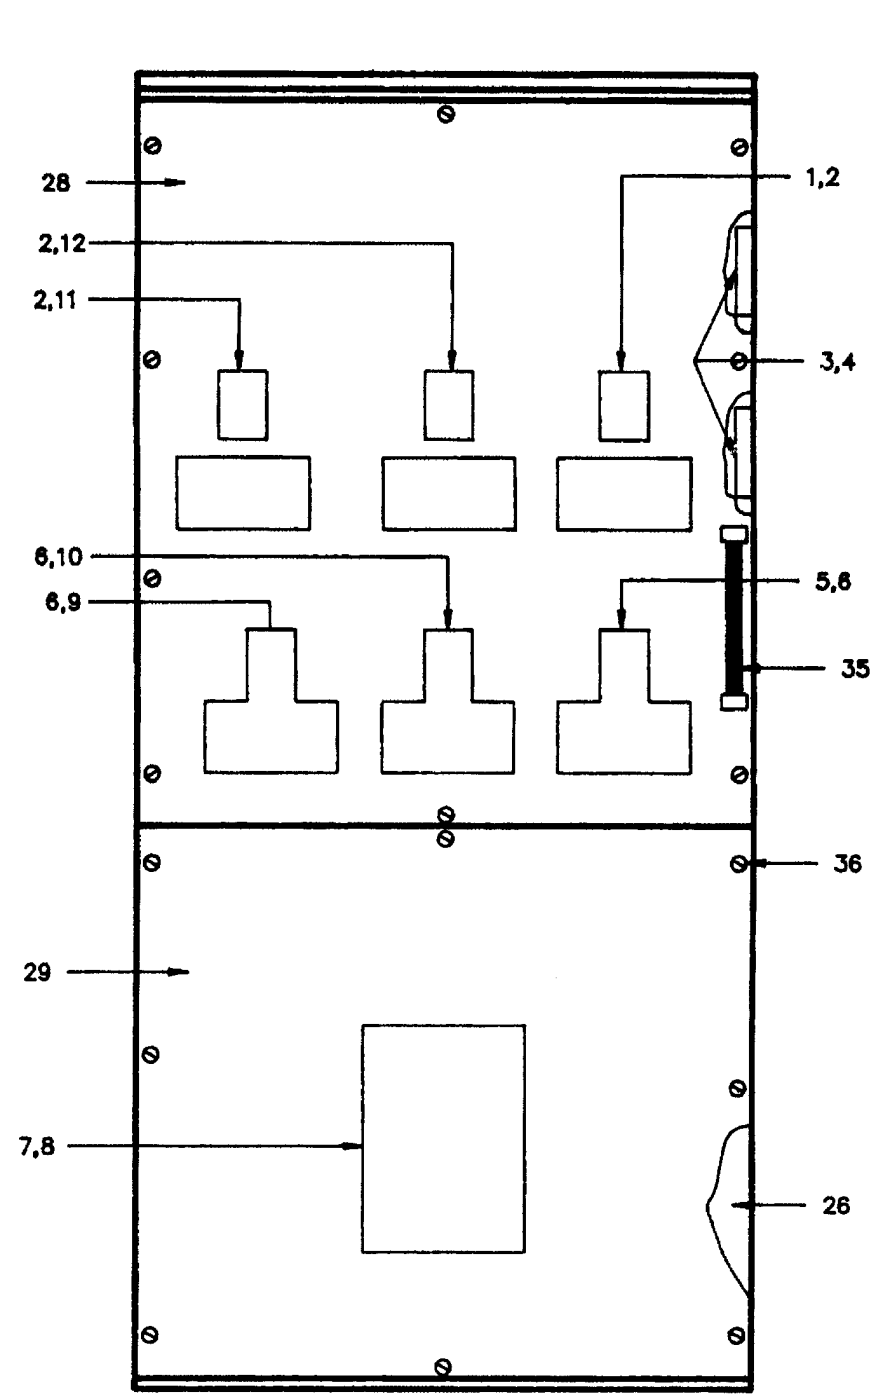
1SB Switchboard Assembly (Sheet 2 of 2)
